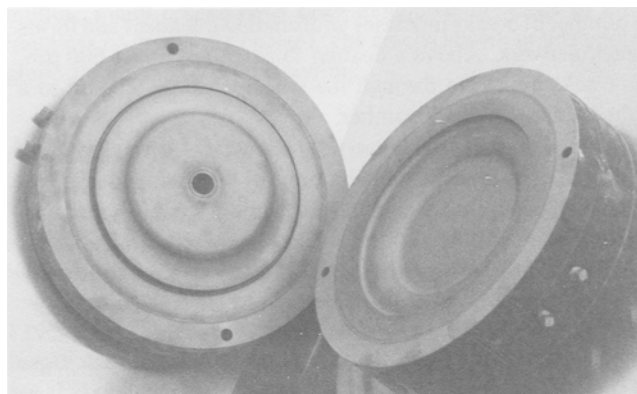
Type 420 stainless steel sprayed injection mold for a flying disk
